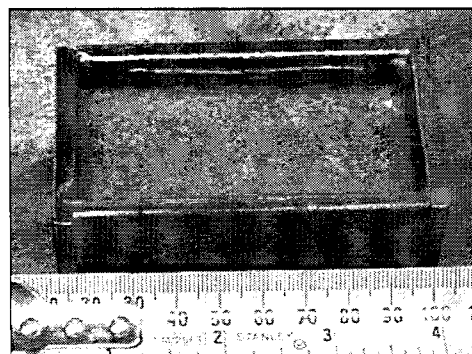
View of finished sample after removal from the vacuum tube furnace.
